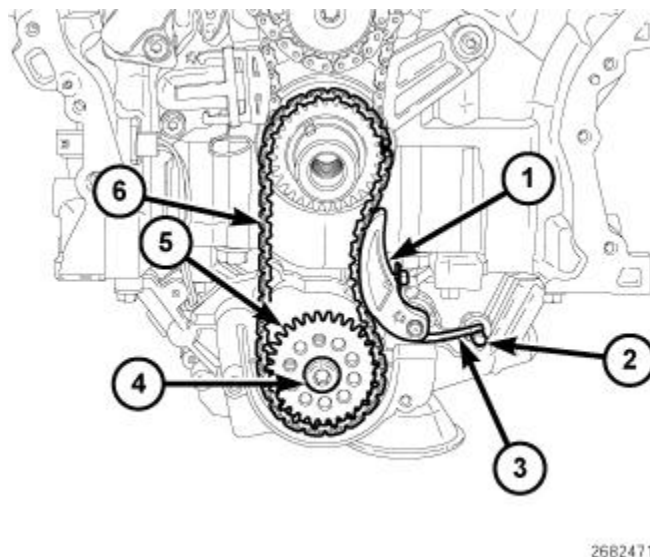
Oil Pump Chain Tensioner, Spring, Retaining Bolt, Dowel Pin, Oil Pump Sprocket & Oil
